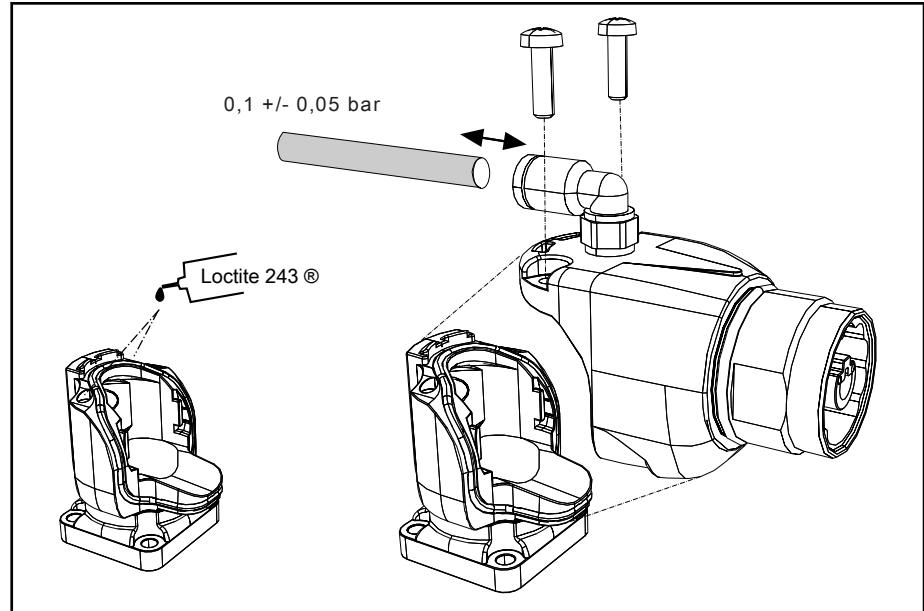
Assembly SUP-M01-MSK on RGS1000
